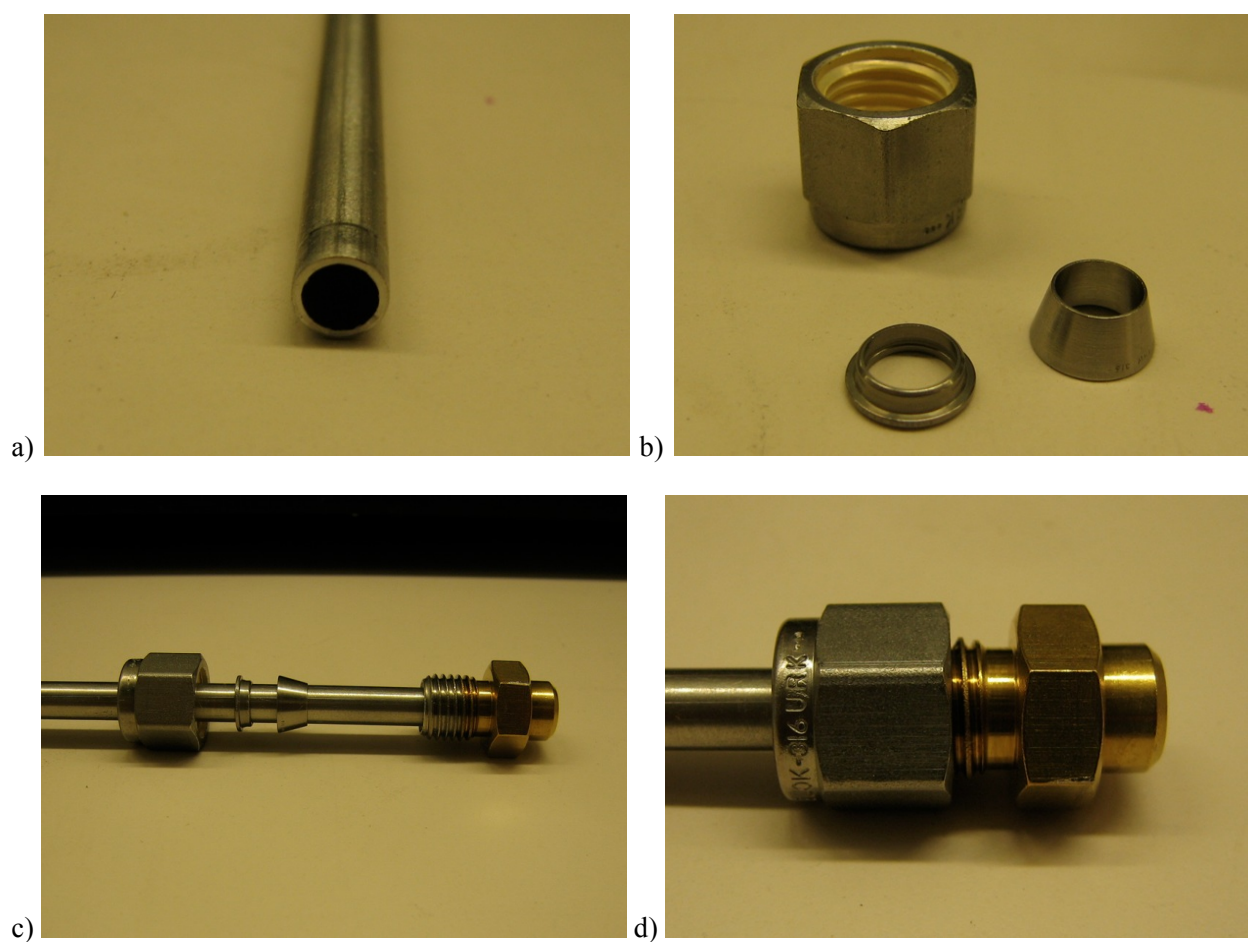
a) Stainless steel tubing (type 316, 0.25" OD x 0.21" ID). b) Swagelok nut and ferrule set. c) Complete end assembly before tightening. d) Packed bed assembly.
